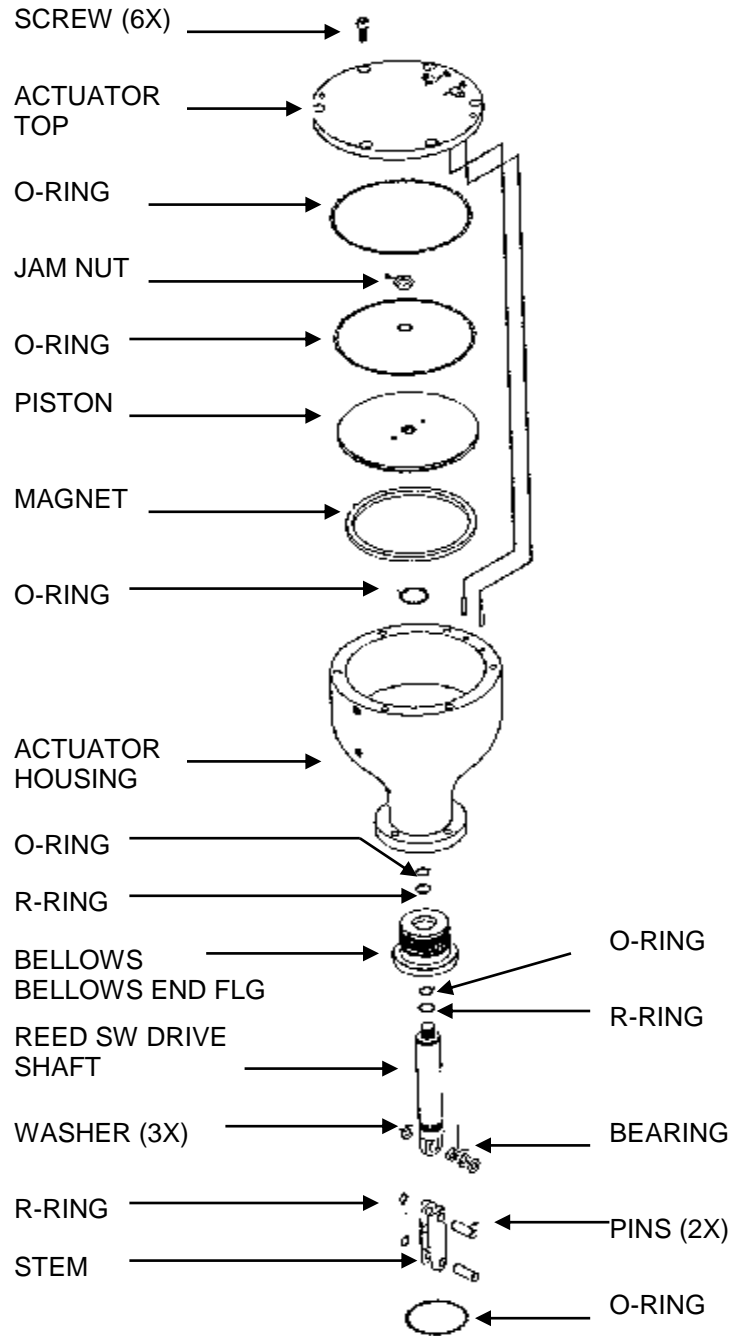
BELLOWS AND ACTUATOR ASSEMBLIES DRAWING
